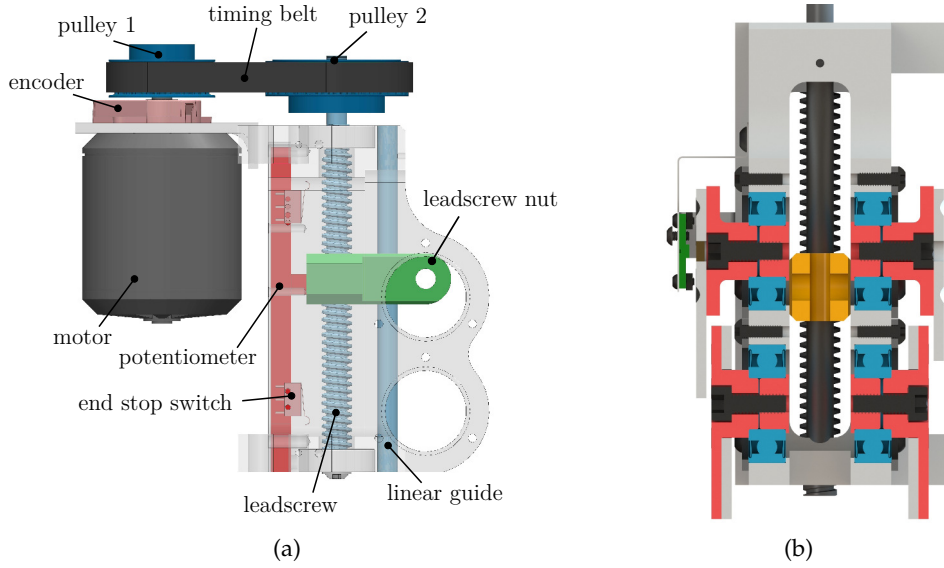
AGB detailed views. (a) Drivetrain. (b) Section view adjustment unit.
